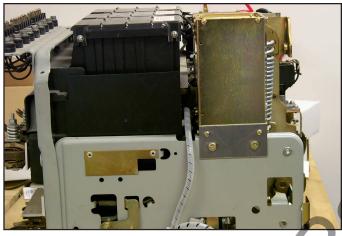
Trip Unit Assembly Mounted to the Left Breaker Frame.
